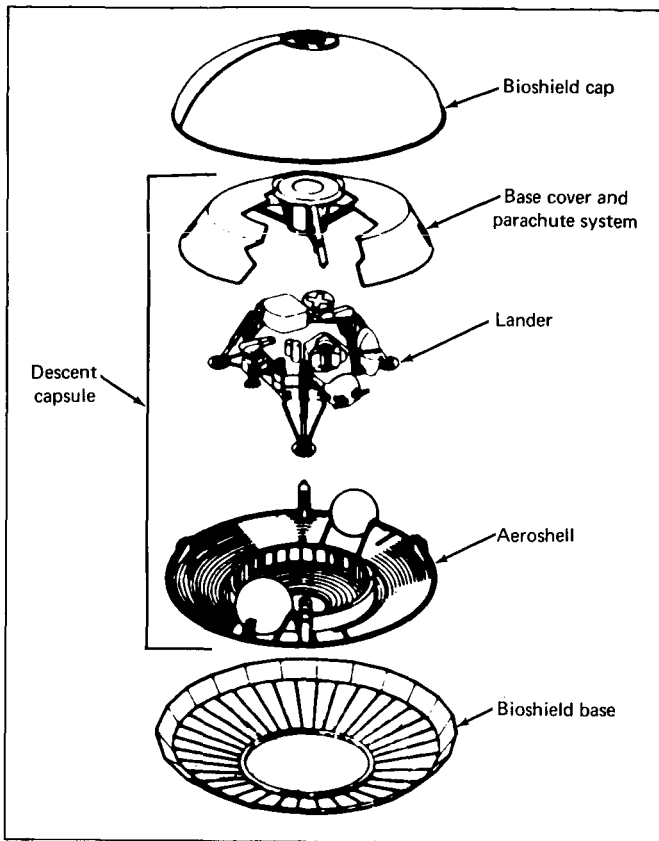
Exploded view of encapsulated Lander capsule.
